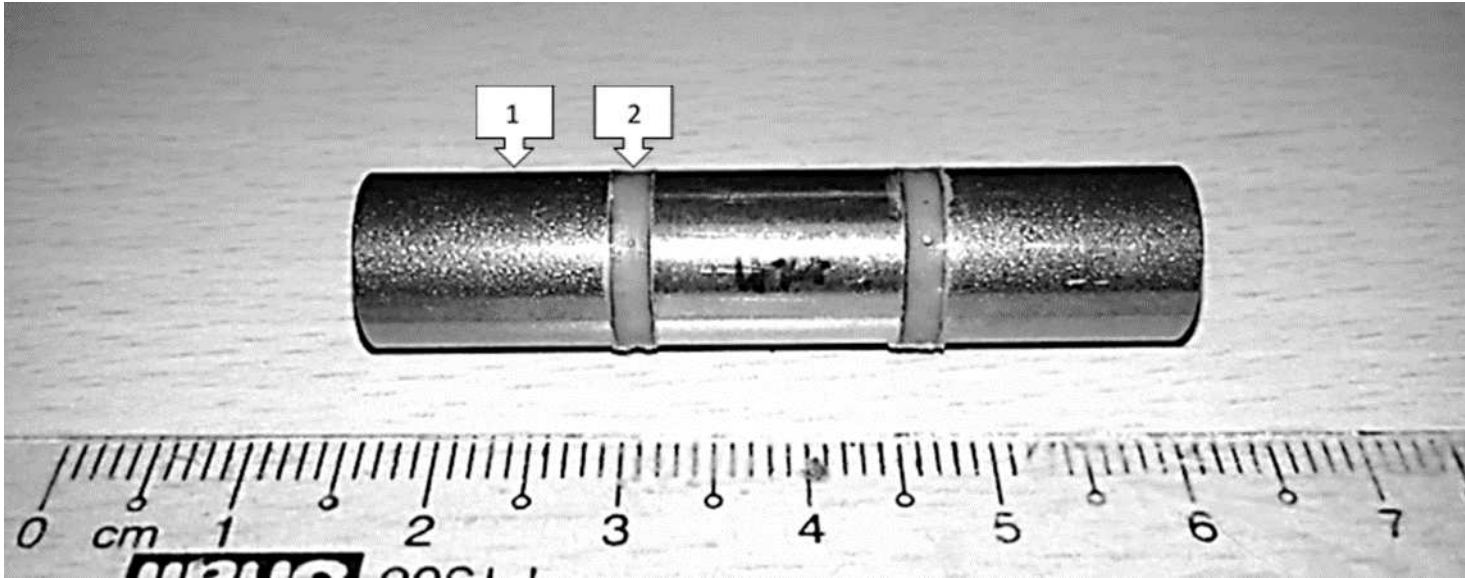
A double bonded shear test piece. 1: stainless steel; 2: rubber.
